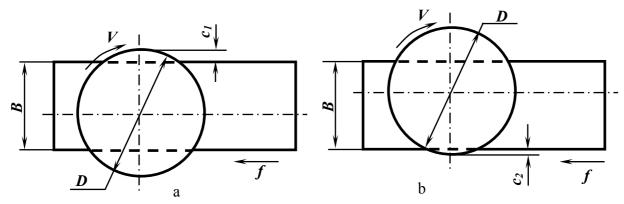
Position of steel workpiece relative to the milling cutter at face milling: a - cutting-in in of cutter tooth at $c_1 = (0.03...0.05\mathbf{D})$; b - exit of cutter tooth at $c_2 = 0$
